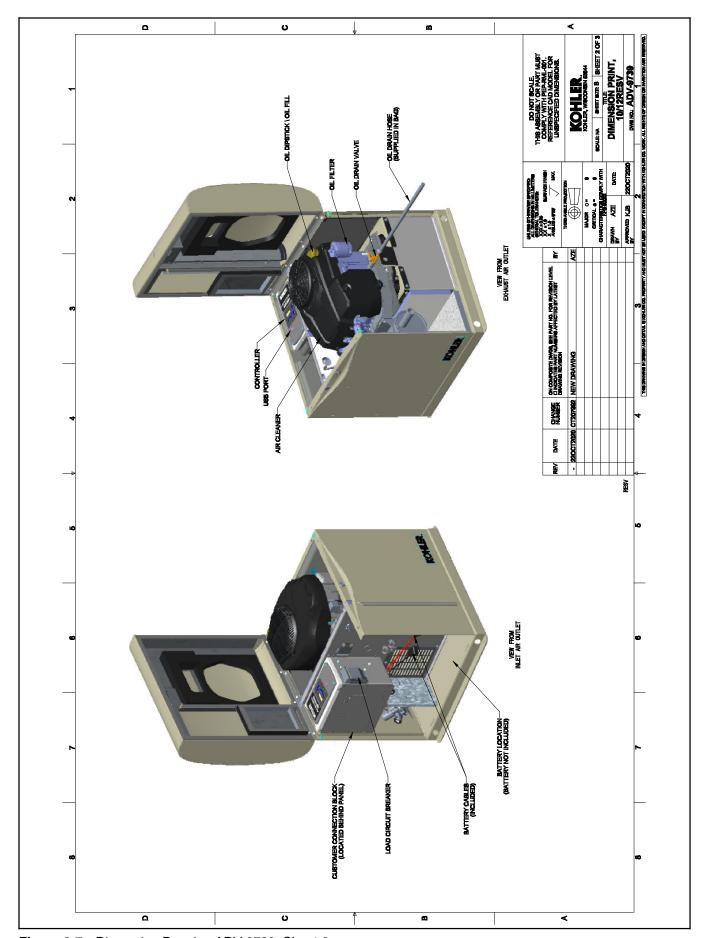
Dimension Drawing ADV-9739, Sheet 2
